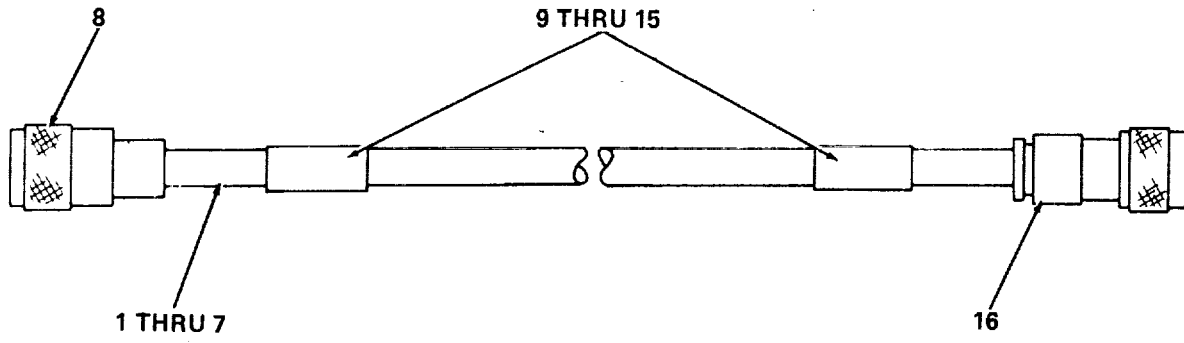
Cable Assemblies 1703-1-2140(GR1-GR 7)
